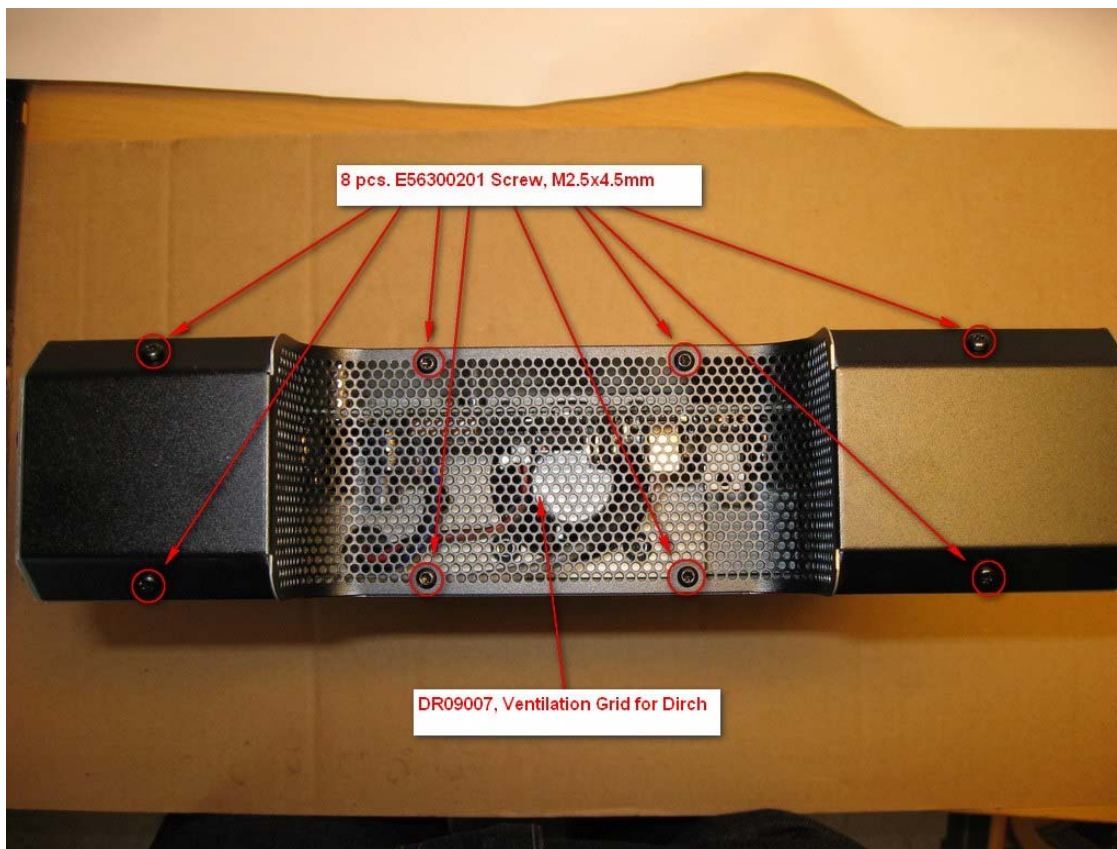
Mount the ventilation grid using eight screws as shown in the picture.
